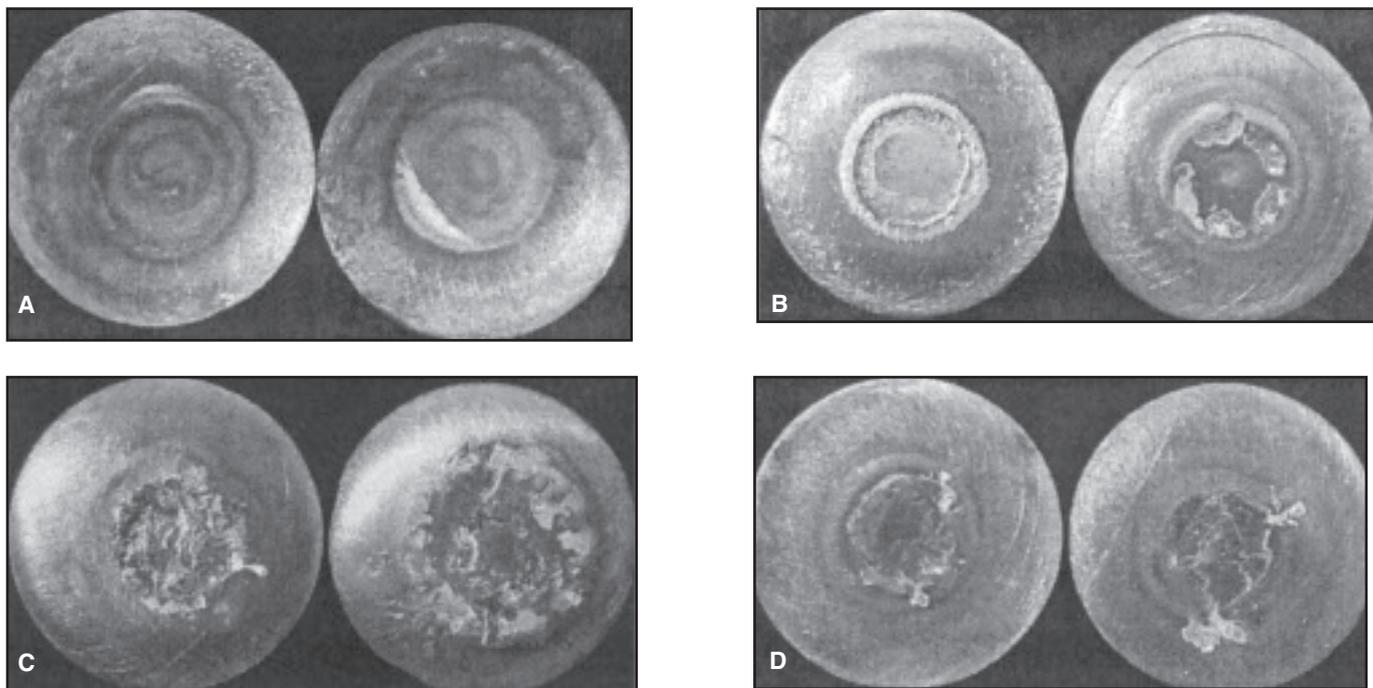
Electrode surface morphology after life tests. A — Chemically cleaned; B — degreased; C — electric-arc cleaned; D — untreated aluminum sheets. The electrodes on the left side are from the lower arm of the welding machine (negative), and those on the right side are from the upper arm (positive).
